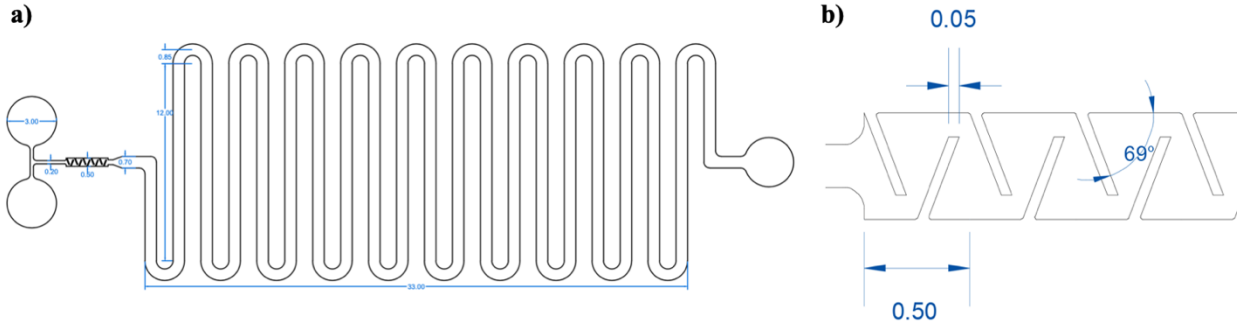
Platform layout: a) AutoCAD® design of the platform; b) detail of the micromixer. All dimensions are in mm.
